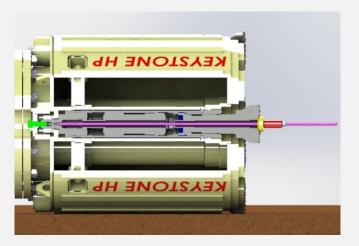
Bit Installation: Bit Installation Tools (Cutaway)
